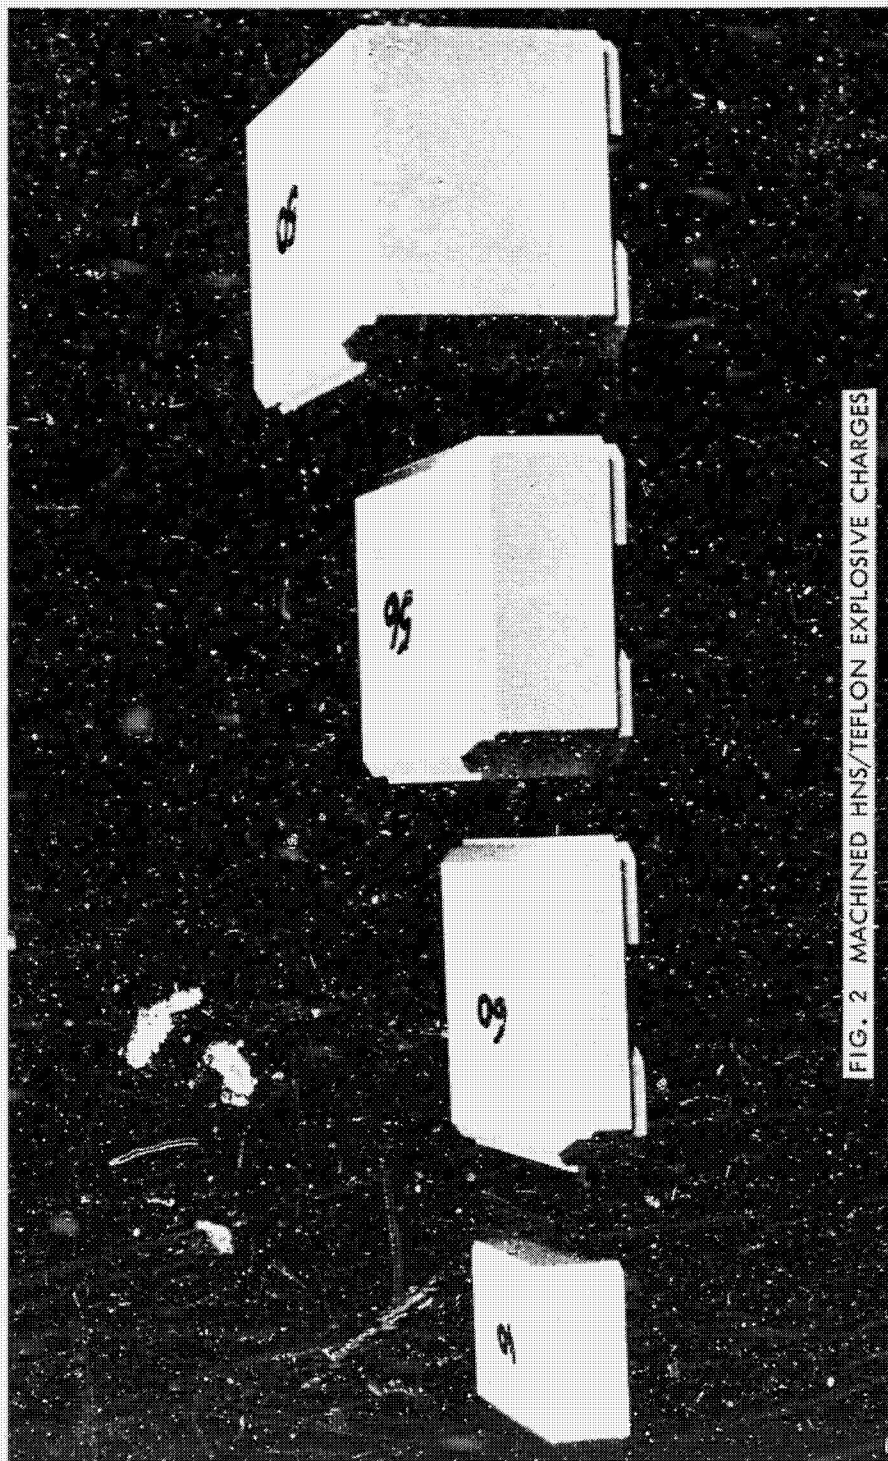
MACHINED HNS/TEFLON EXPLOSIVE CHARGES
